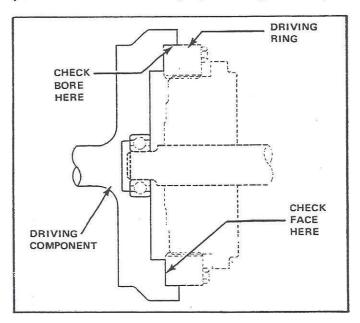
Air Operated Clutch with Driving Ring Bolted to the Driving Component (Typical Installation).
